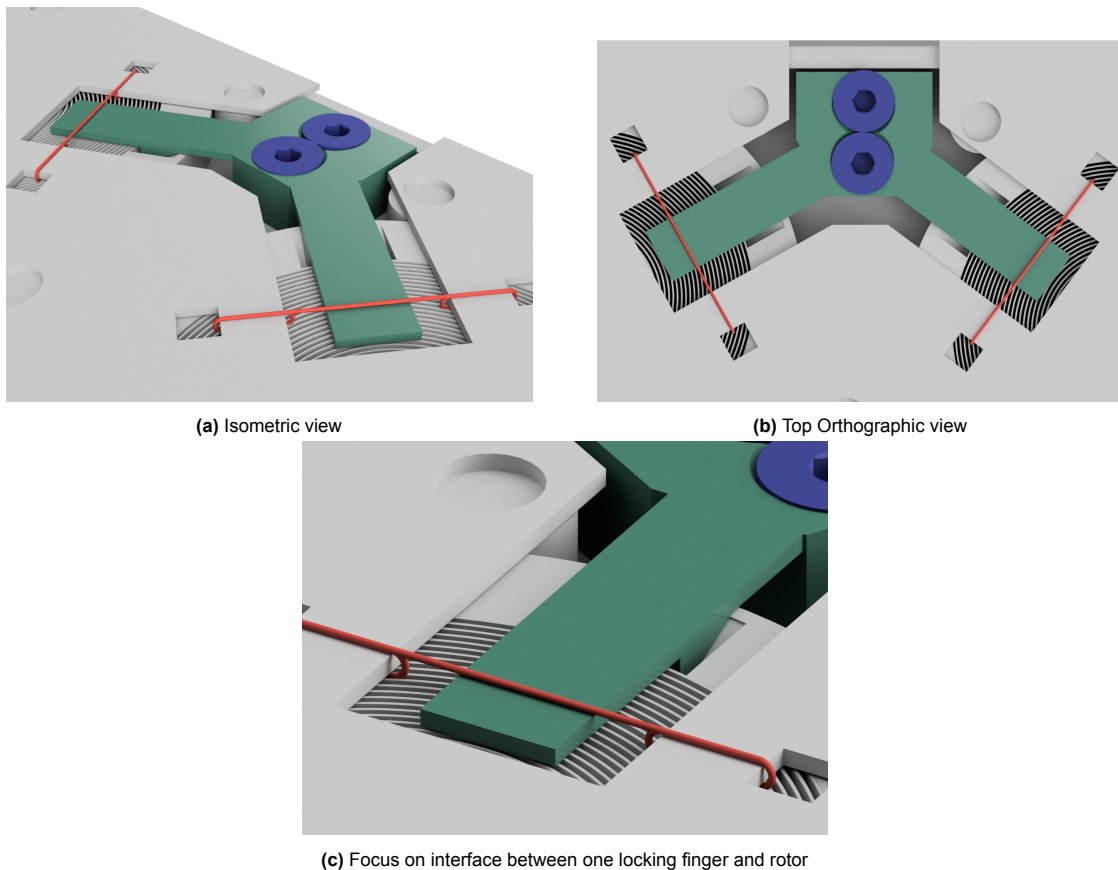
HDRM assembly components coloured; burn wire(s) in red; locking fingers in green; retaining M2.5 bolts in blue
